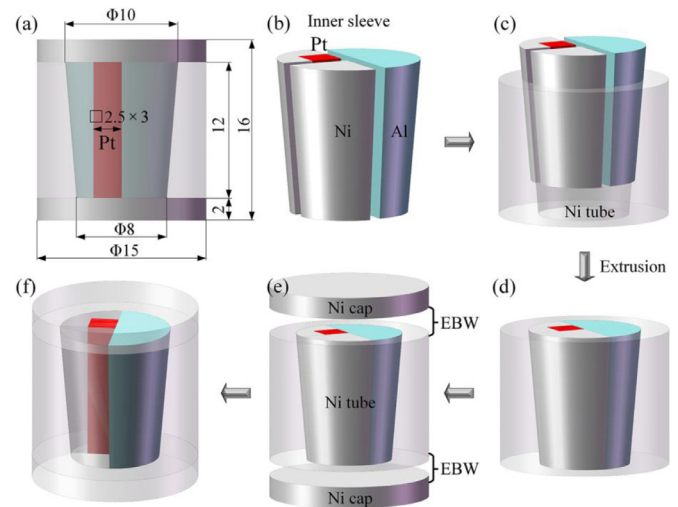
Schematic illustration of the Ni/Al/Pt diffusion triple: (a) longitudinal section dimensions (in mm), (b) inner structure, and (c–f) assembly using extrusion and electron-beam welding (EBW).
